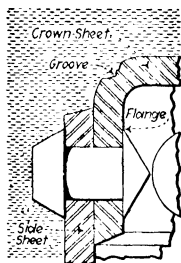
Groove corroded in outer curve of flange of crown sheet in horizontal fire-box boiler.
